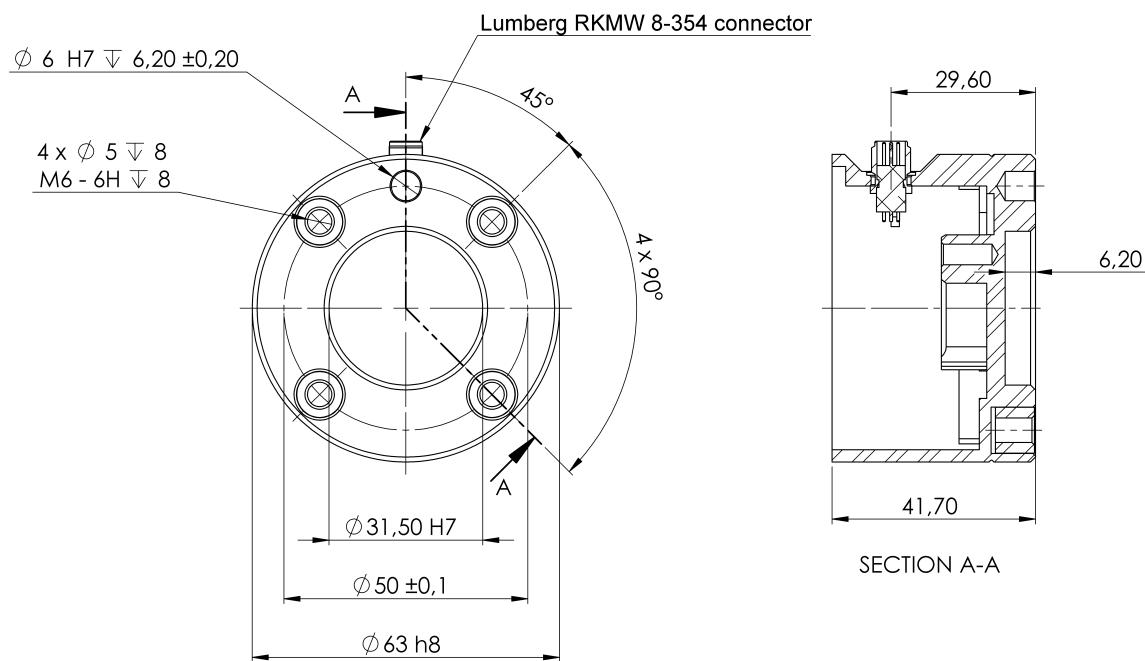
The tool output flange (ISO 9409-1-50-4-M6) is where the tool is mounted at the tip of the robot. All measures are in mm.
